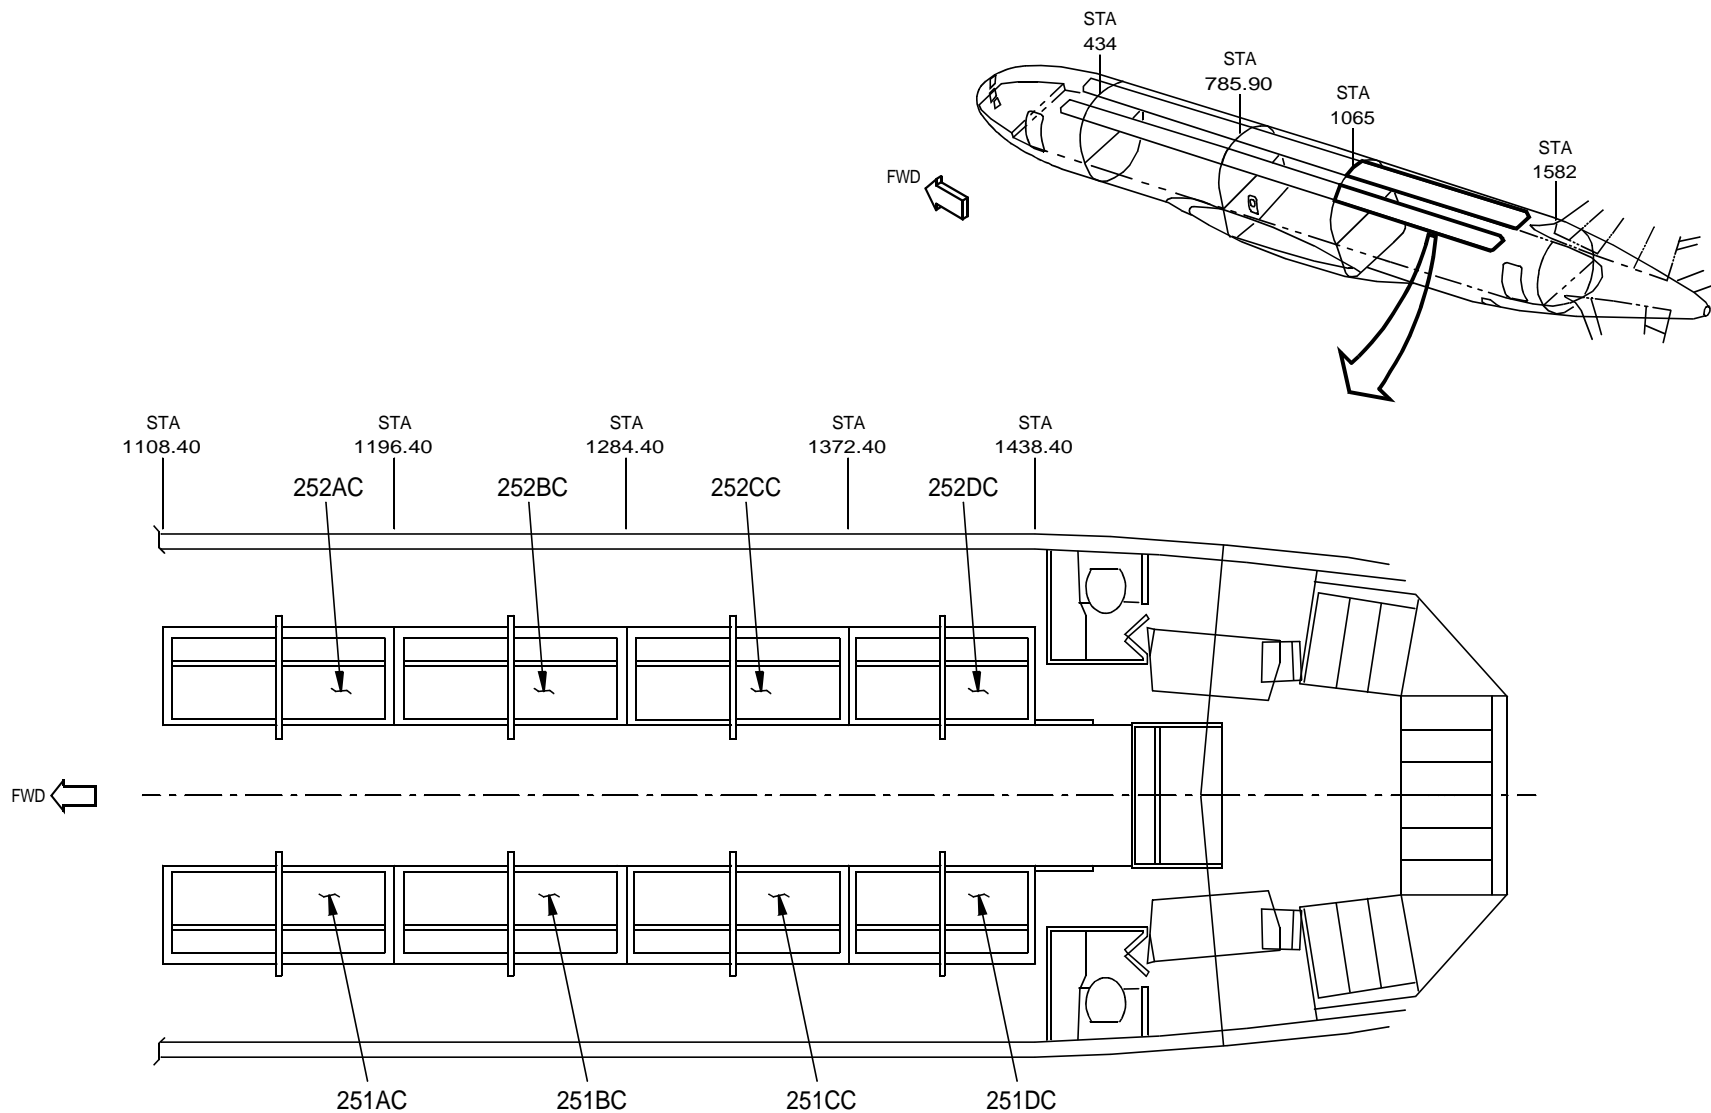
SUB-MAJOR ZONE 251/252 PASSENGER CABIN CEILING PANELS (-200 ONLY)
